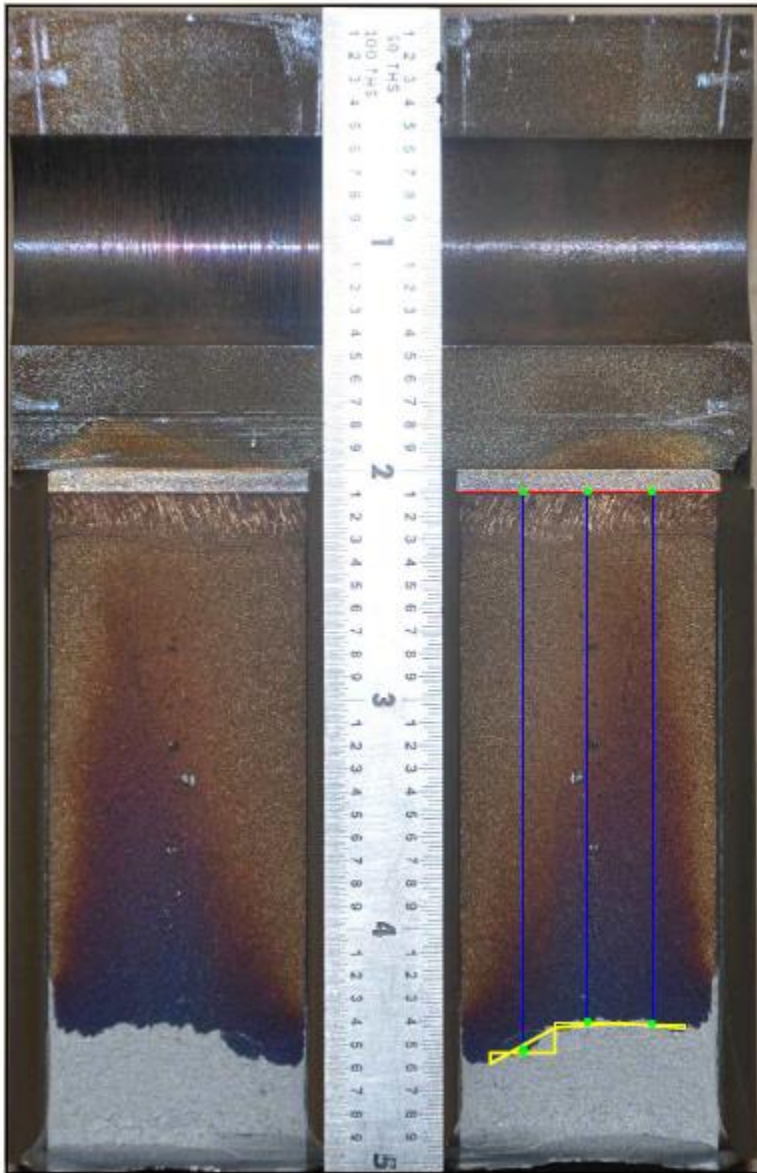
Specimen E1a Fracture Surface
